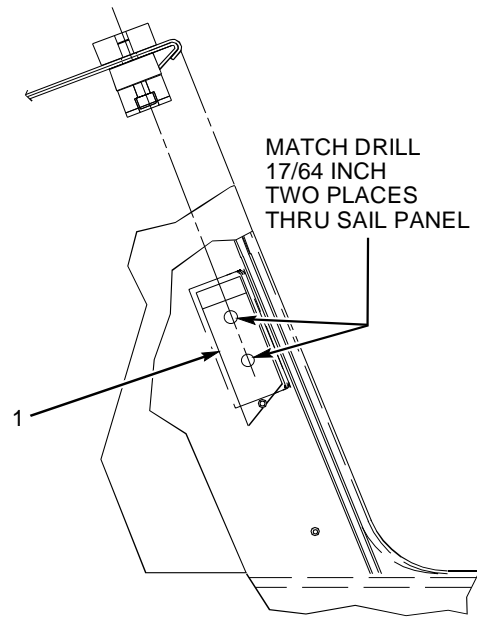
Front Door Ramp Block Locations (2 and 4 Door)
